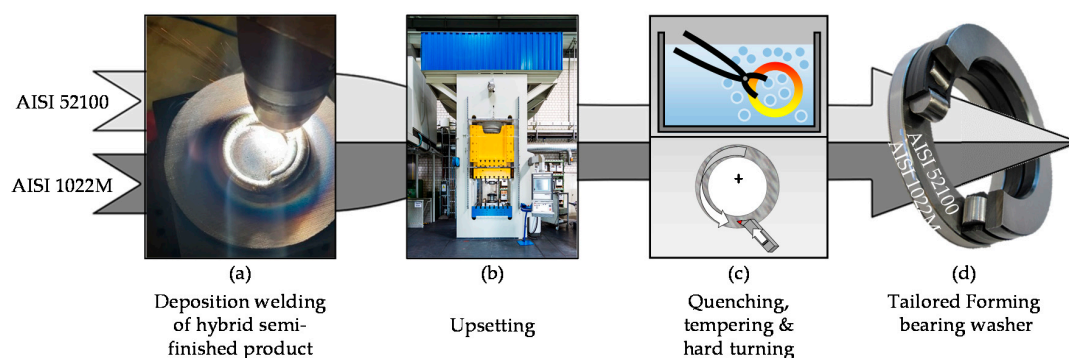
Process chain for manufacturing a hybrid cylindrical roller thrust bearing washer by tailored forming: (a) plasma-transferred arc deposition welding; (b) upsetting; (c) heat treatment by quenching, tempering, and subsequent mechanical processing; (d) bearing assembly for analysis in a test bench.
